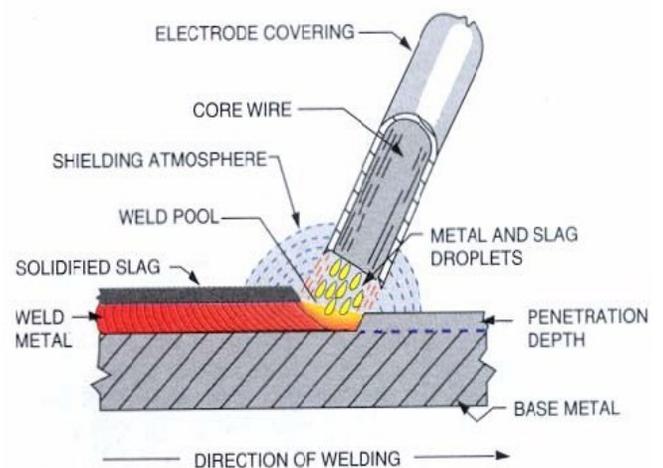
Shielded Metal Arc Welding Process (Genculu, 2011)
